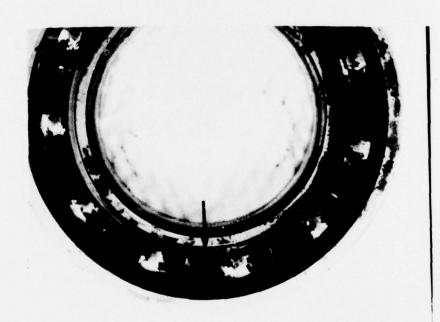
Bearing S/N TRL-26. Removed Position 7 With 11.0 Hours. 2x Enlarged View. Note Crack in Cage.
